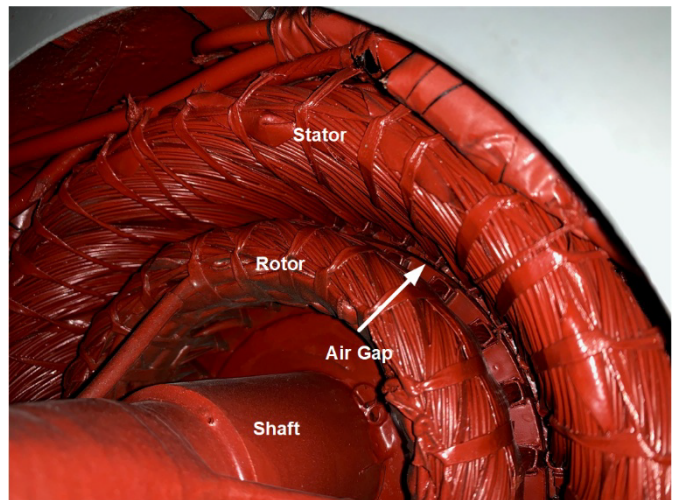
Windings of the 220 V, 10 hp wound-rotor asynchronous machine.
